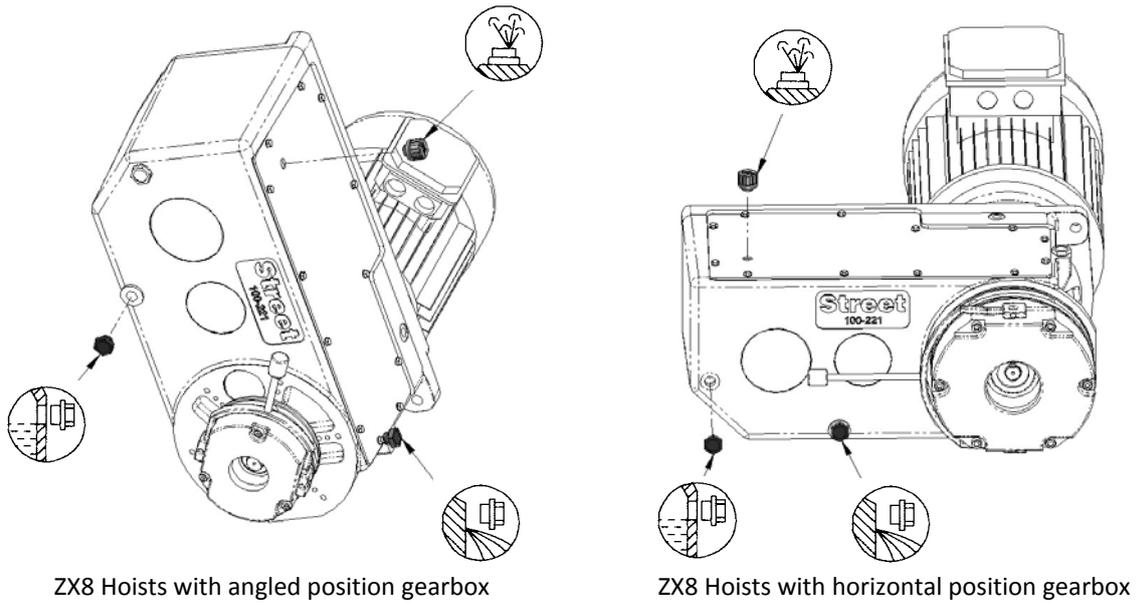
ZX8 Gearbox oil fill & level plug locations
